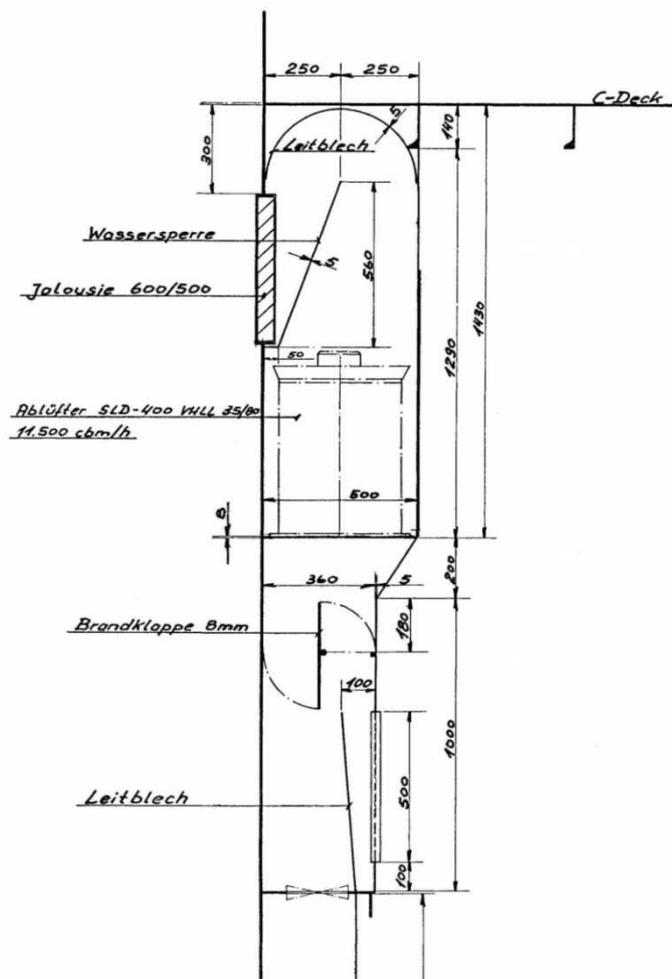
Drawing of the side ventilation ducts, Drawing S 590 – 64/11
